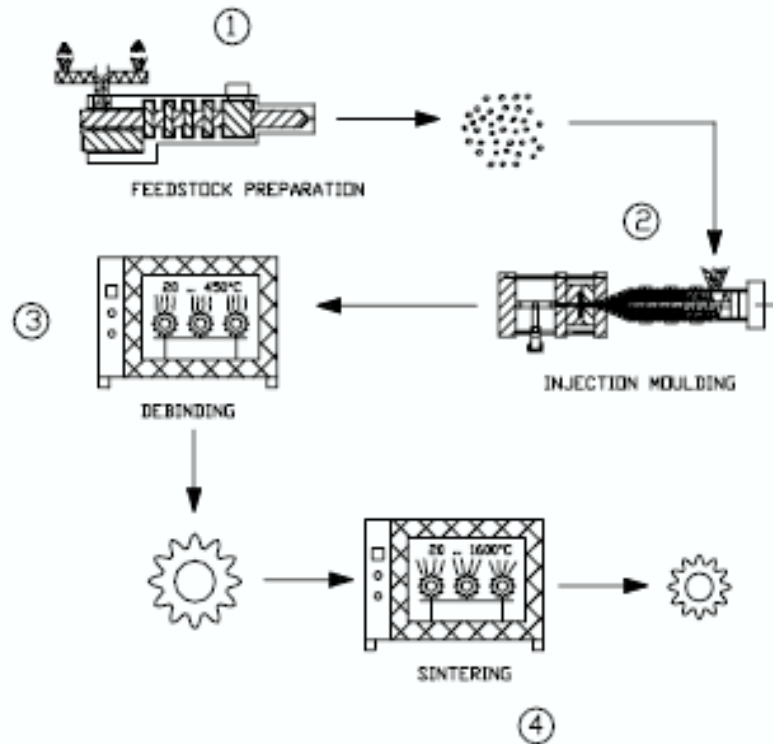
Steps of μ -PIM technique: 1) feedstock preparation; 2) injection moulding; 3) debinding; 4) sintering [13].
